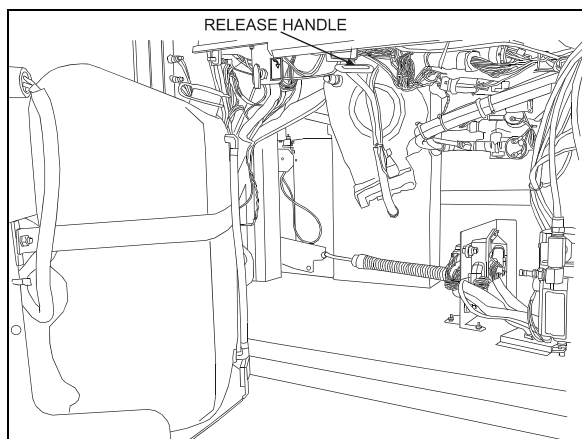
FRONT BUMPER RELEASE HANDLE
